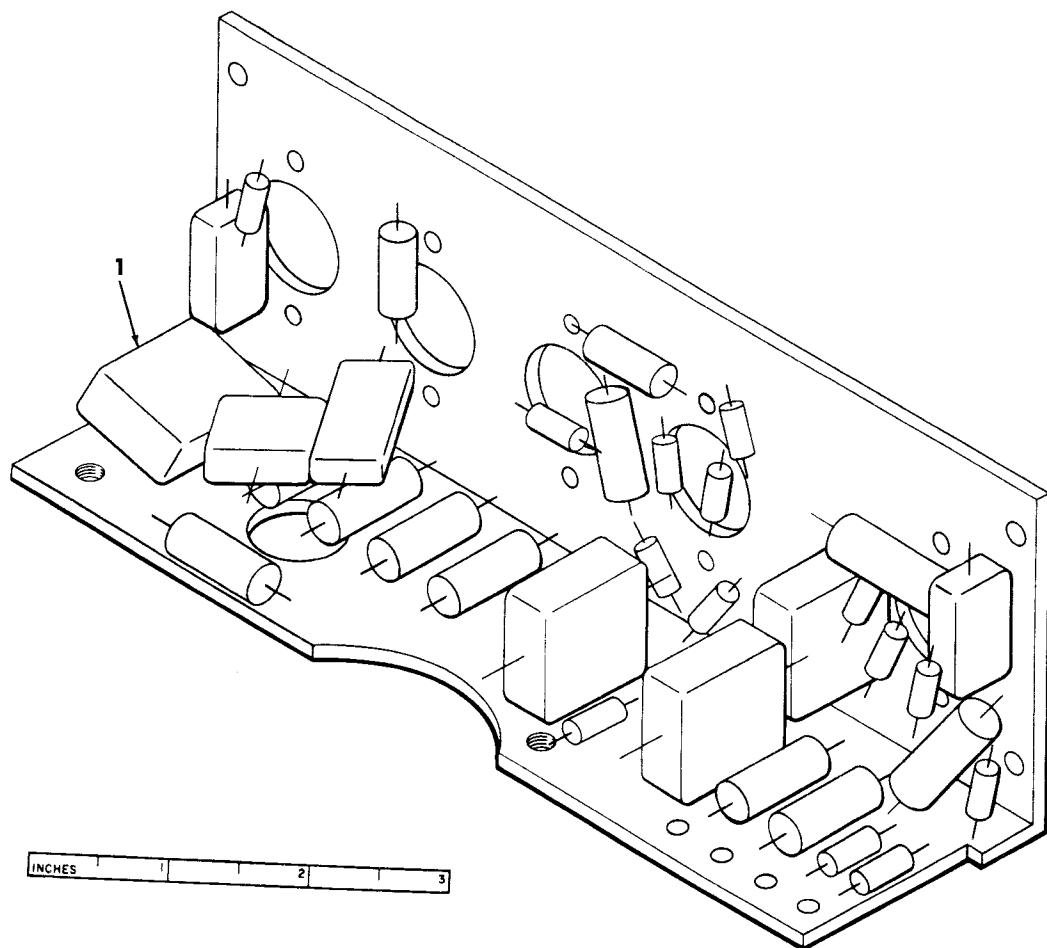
Oscillator subassembly (9141254) – partial exploded view
